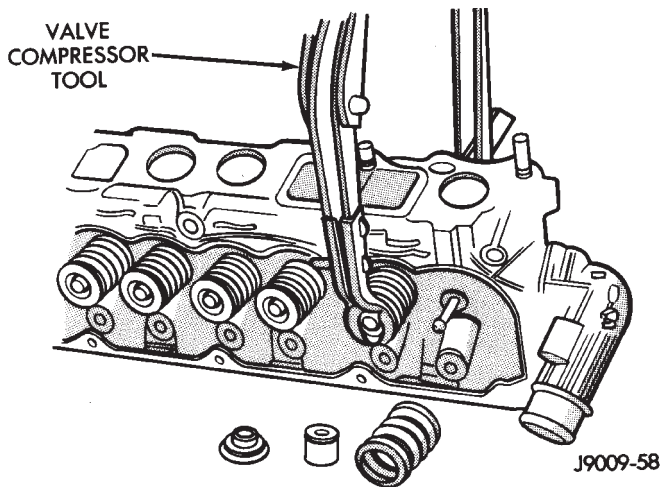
Valve Compressor Tool C-3422-B (J-8062 or 8014)
